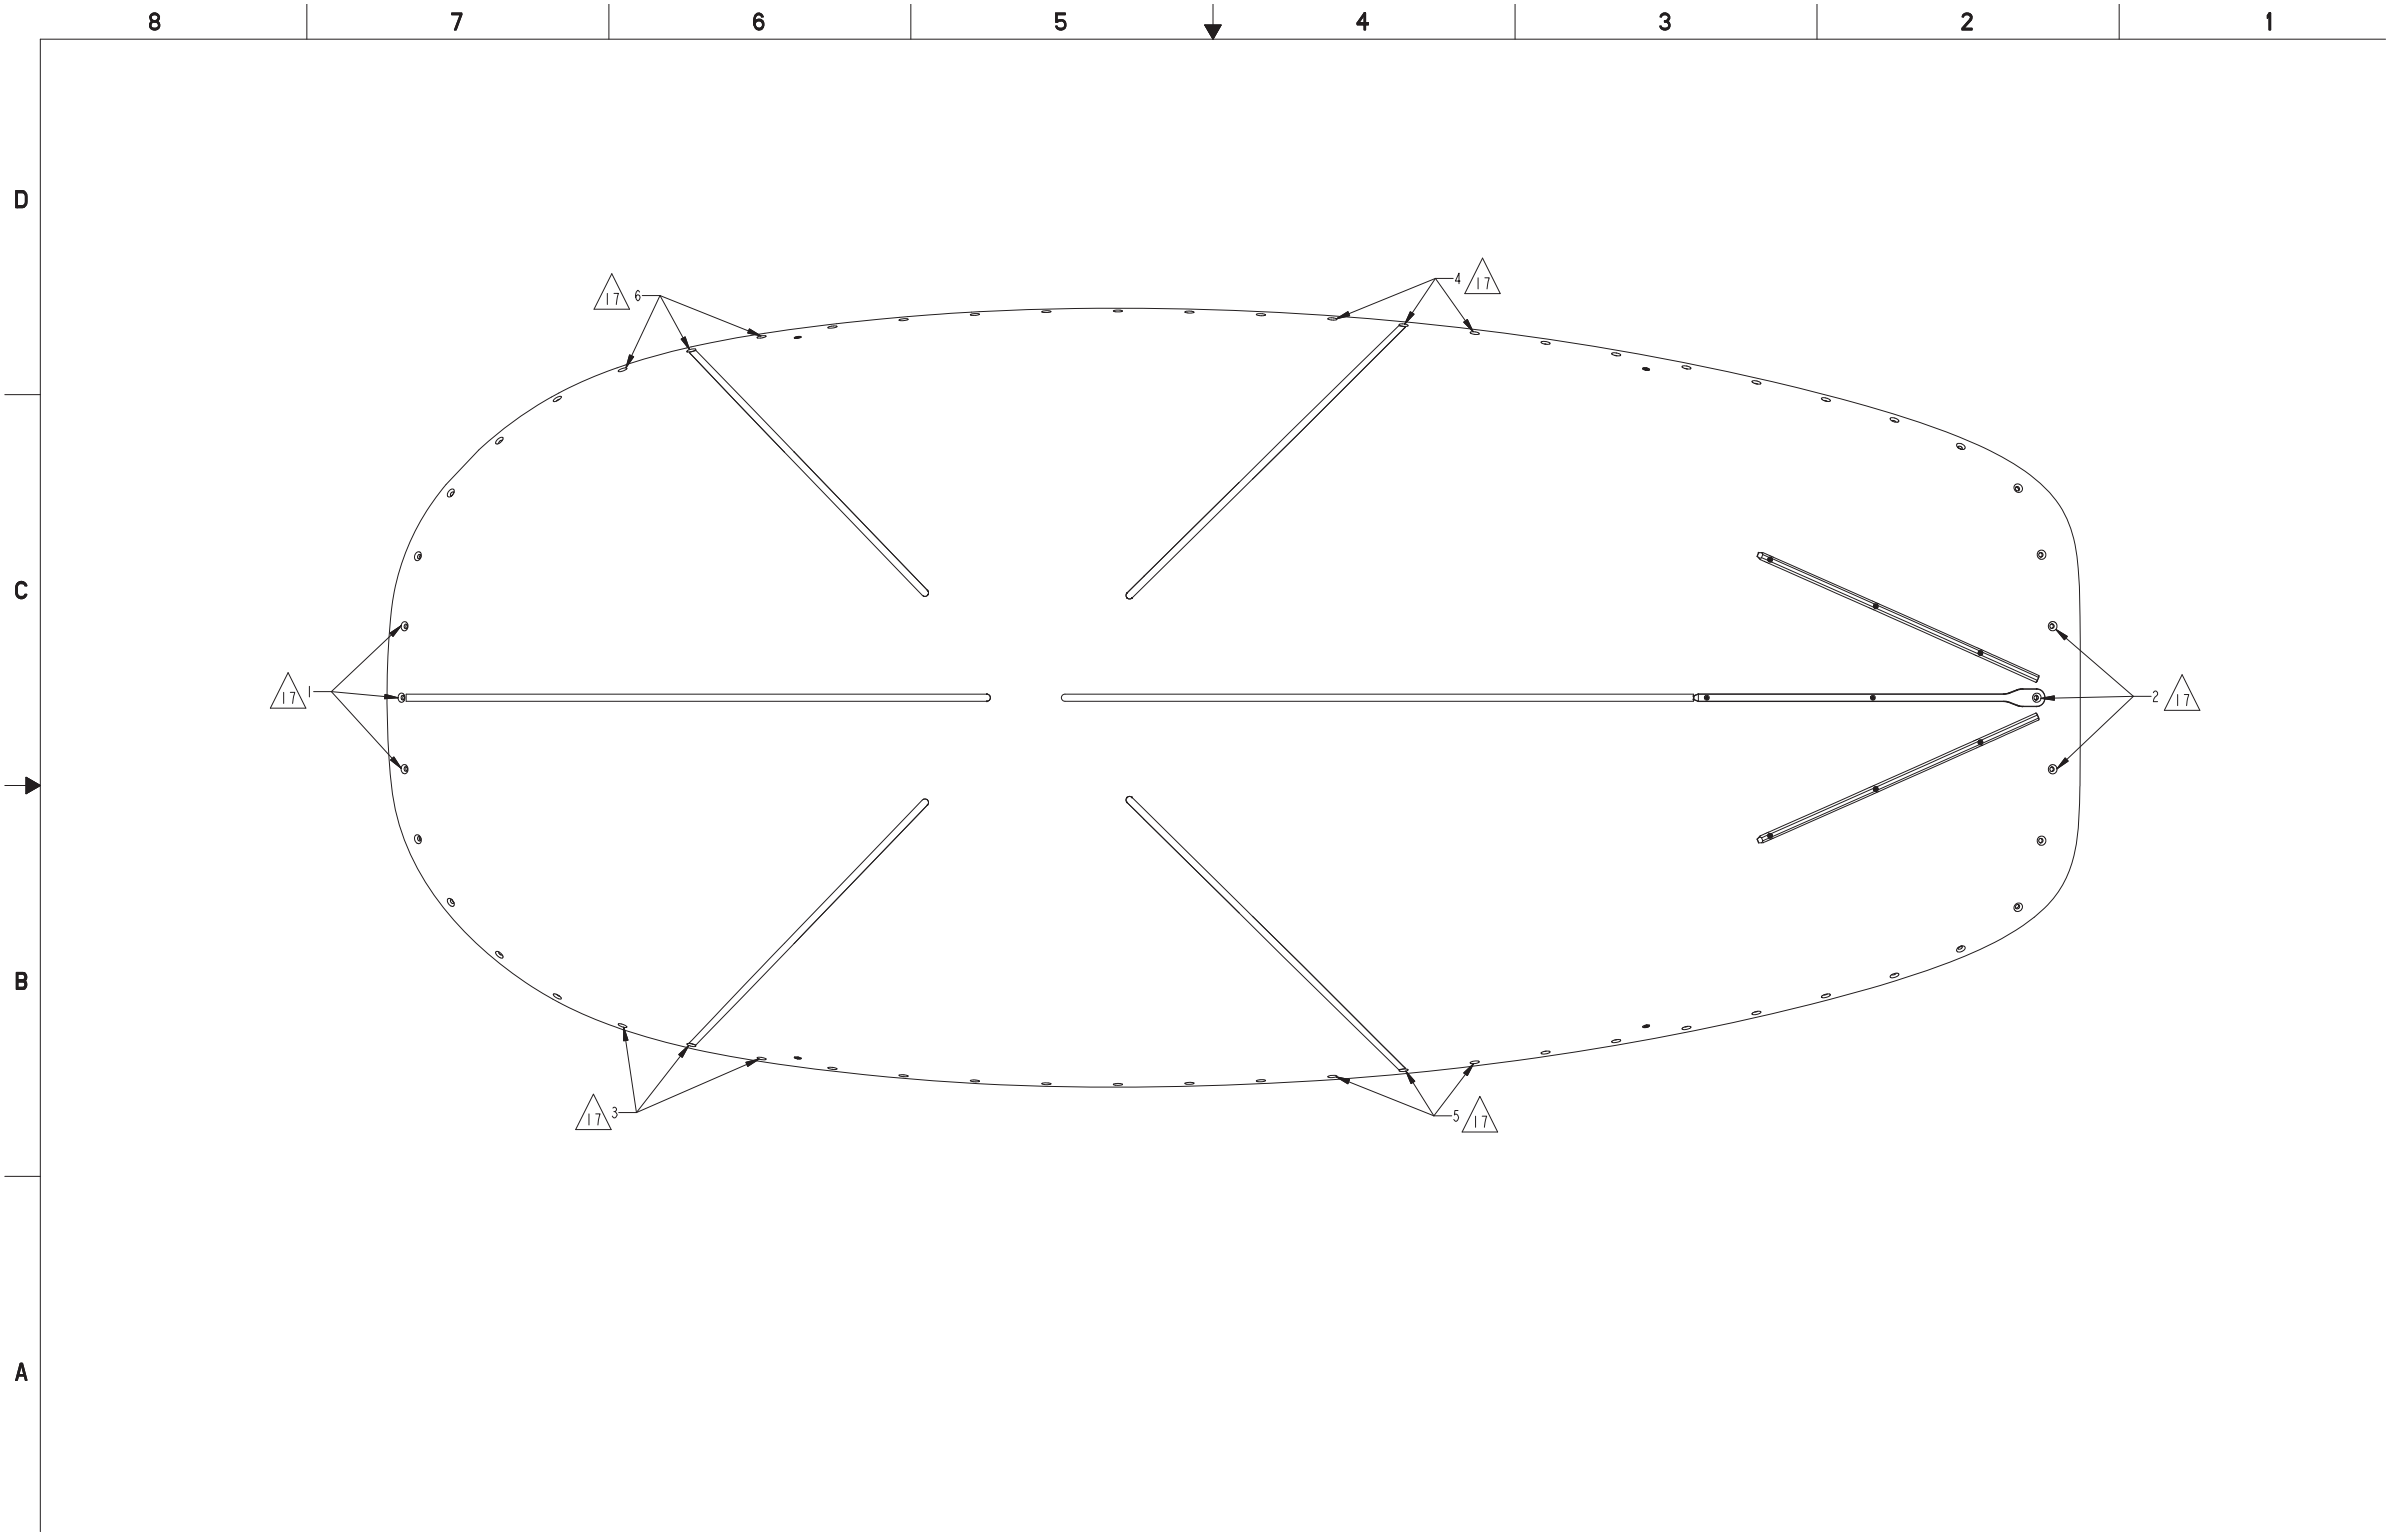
Fuselage Mount Radome Outline and Installation Drawing (Sheet 6 of 6)
